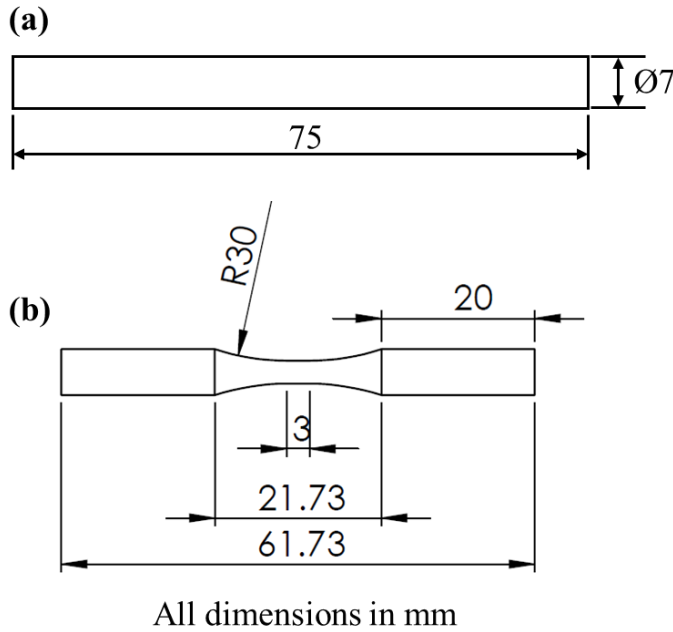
(a) As fabricated round bar and (b) post-machining fatigue specimen geometries.
